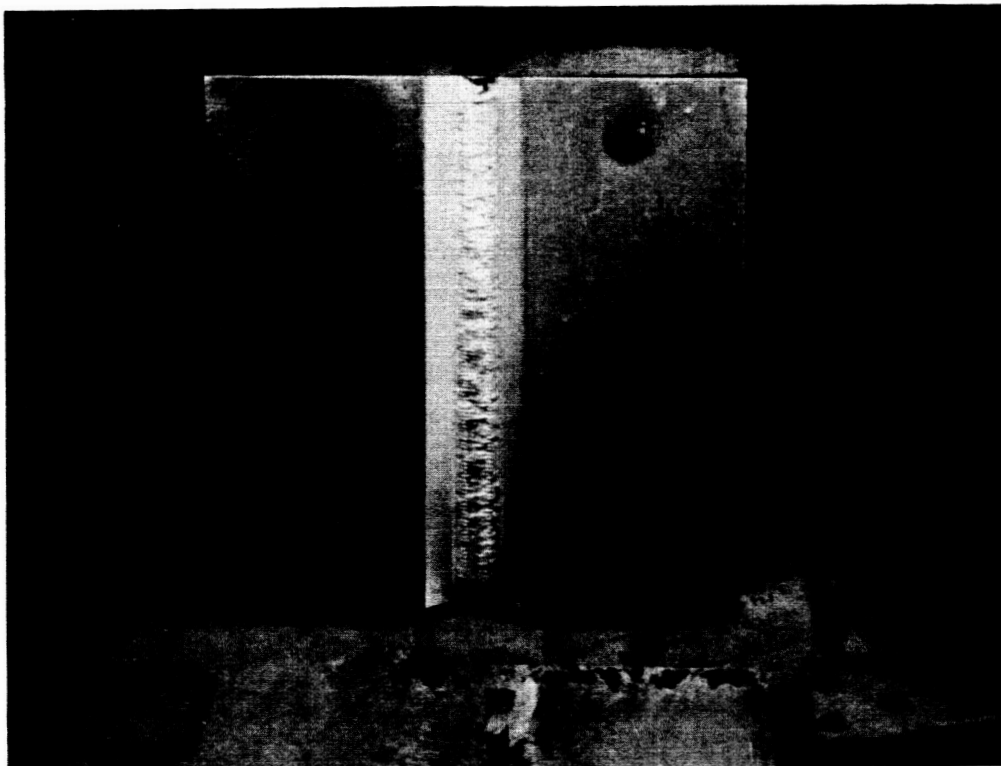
FIRST PASS OF WELD IN 1-INCH ALUMINUM PLATE.
